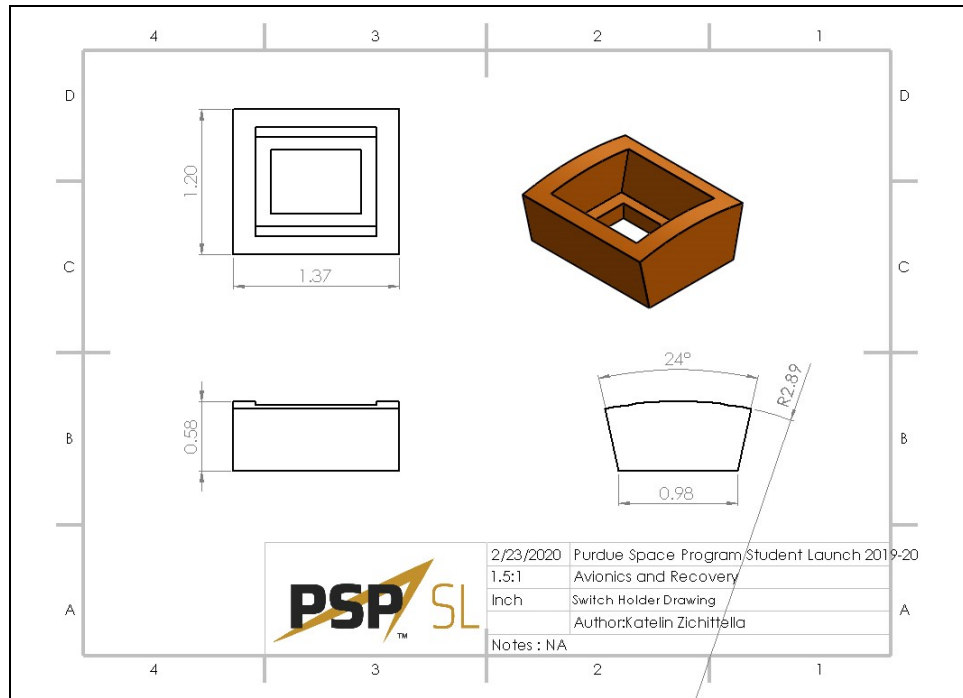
Avionics Bay Switch Holder Dimensional Drawing
